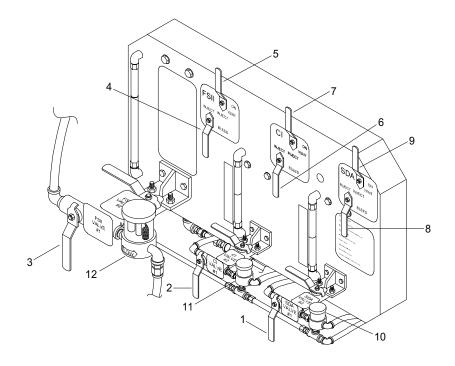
Priming Fuel Additive Injector Assembly with On-Board Priming System.
